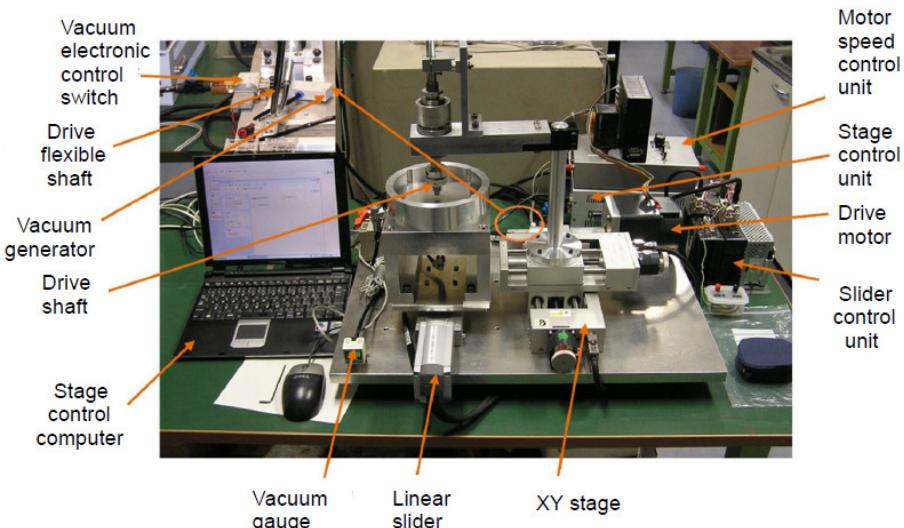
Prototype developed to carry out the enhancement tests of trajectory in magnetic abrasive polishing.
